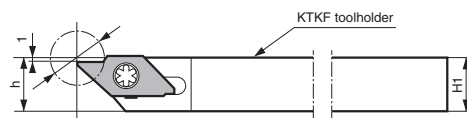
When a TKF-AS/-ASR insert is attached (The cutting edge is 1mm lower than the center line.)
